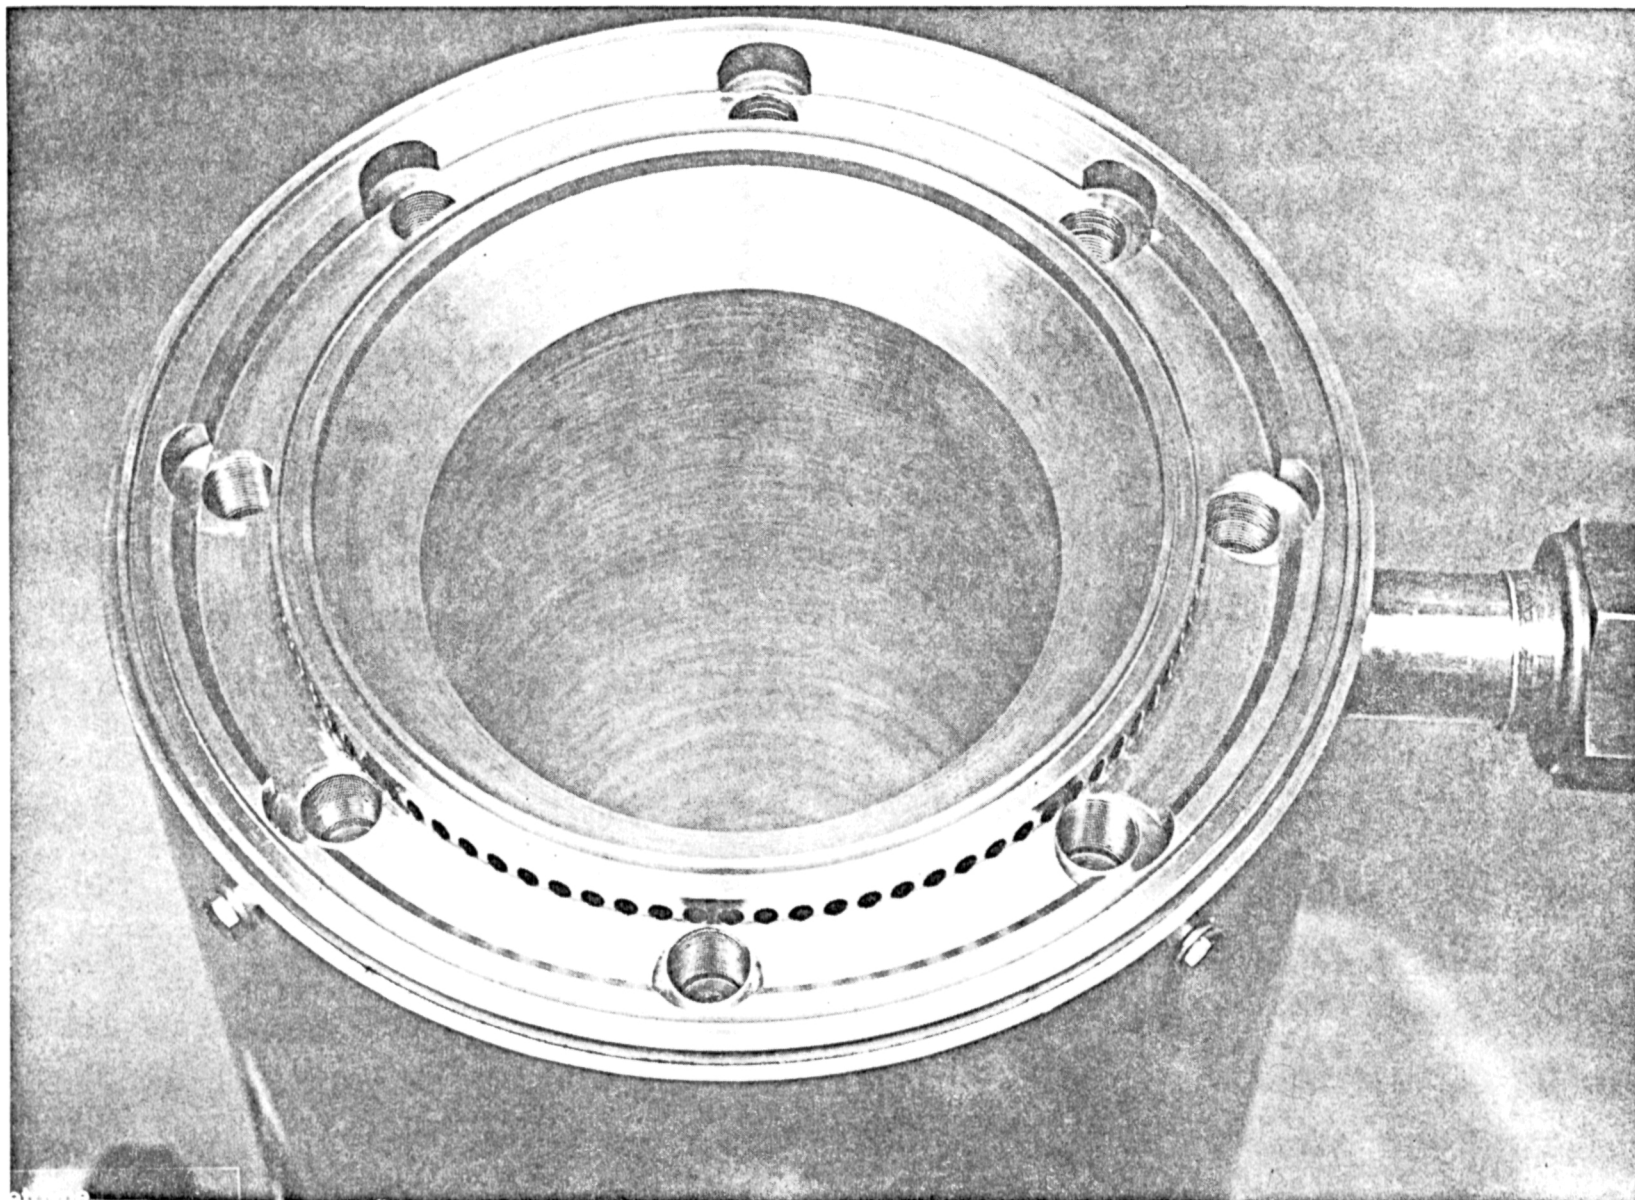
Thrust Chamber Assembly End View Illustrating Coolant Passage Discharge Porting
